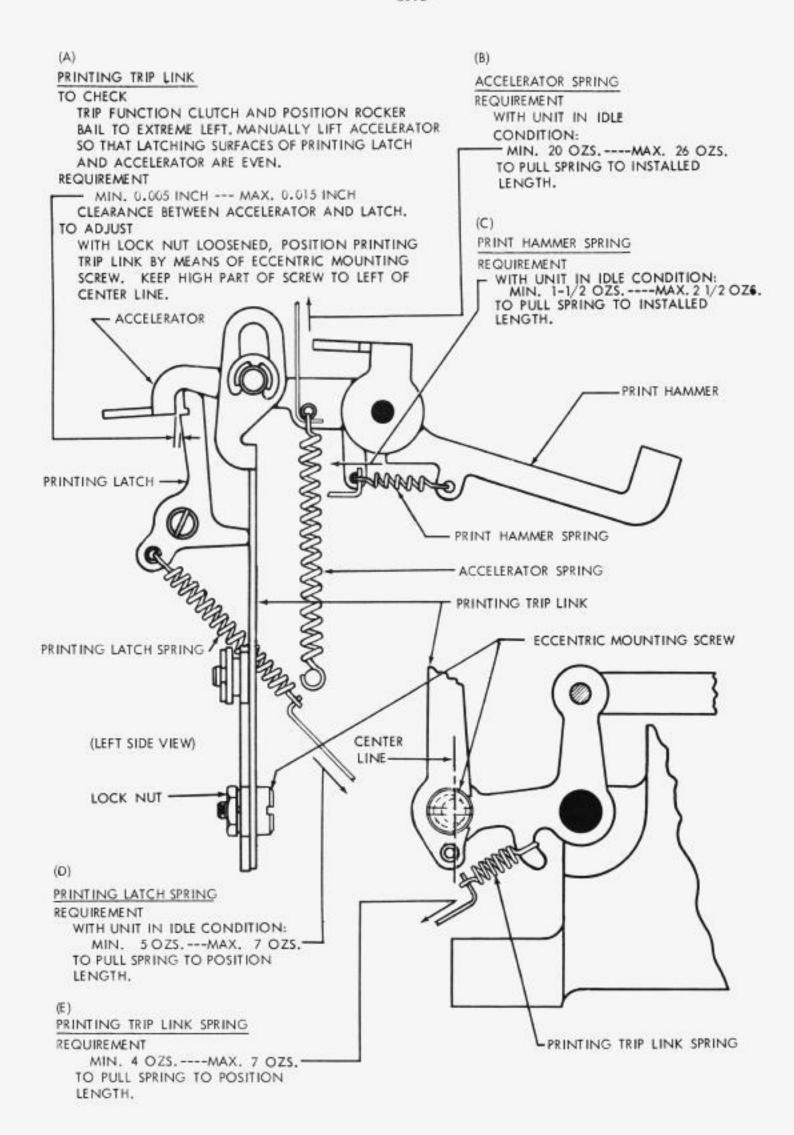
PRINTING MECHANISM FOR CHADLESS TAPE
